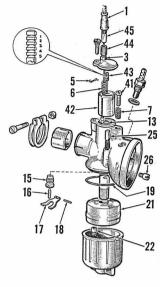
Exploded view of Villiers S.12 carburetor.
